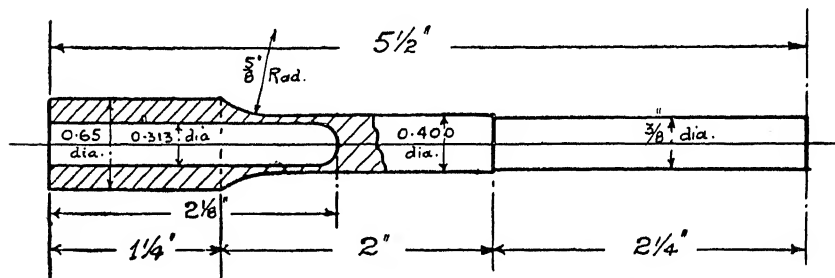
Test Piece for Wohler Fatigue-testing Machine.
